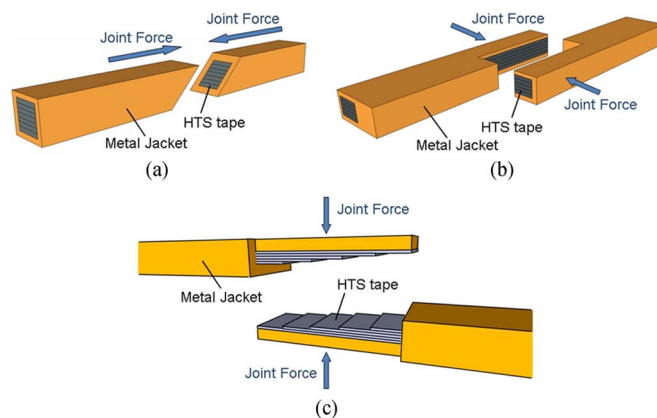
Schematics of the electrical joints of stacked HTS conductors. (a) Butt joint. (b) Edge joint. (c) Lap joint.
